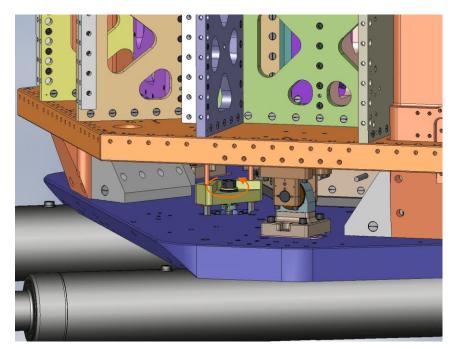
Loosen all (3) Spring Pull-Down Assemblies evenly, until the Flexure Assemblies are fully tensioned.
